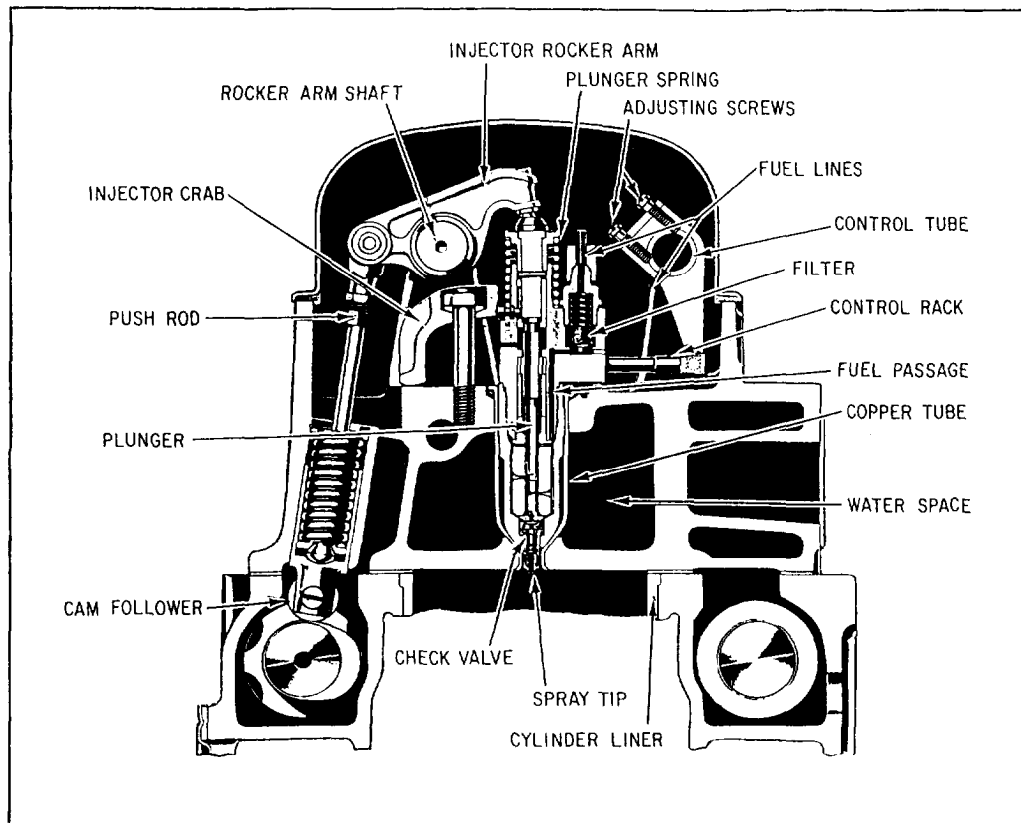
Mounting of the unit injector in the cylinder head.
